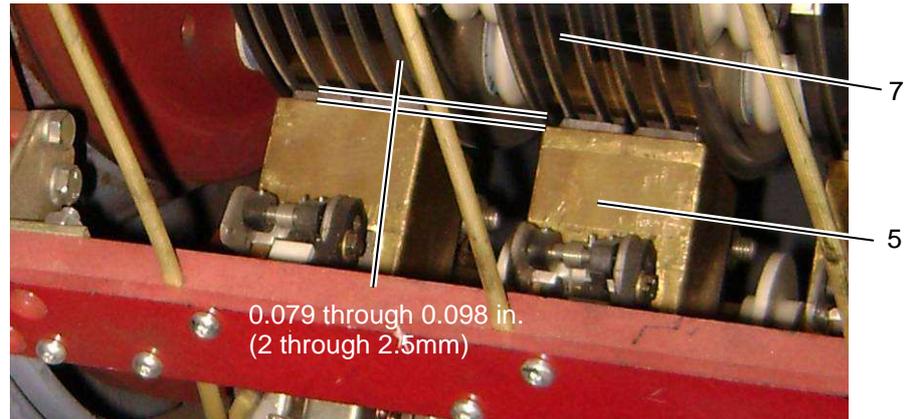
6 Brush holder box and slip ring (example: VEM)
